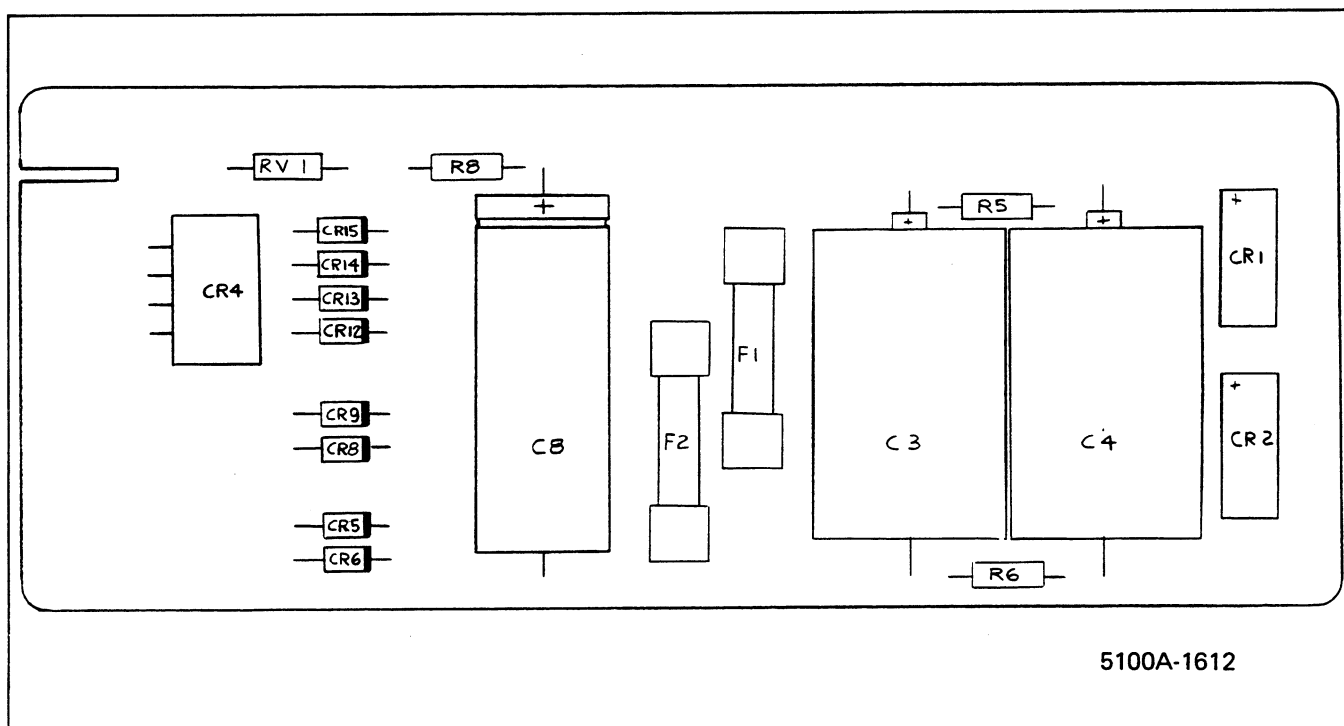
A7A2 Aft Transformer Terminal PCB Assembly
